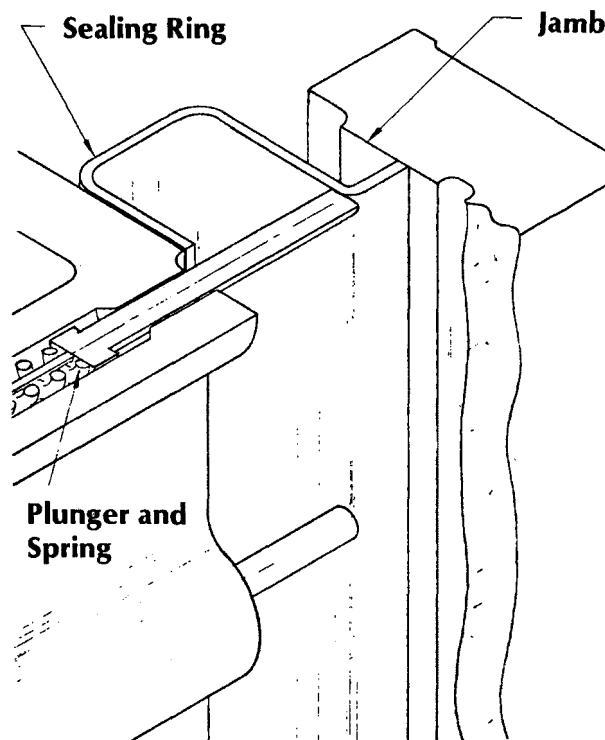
SIDE VIEW OF S-SHAPED SEAL SYSTEM
